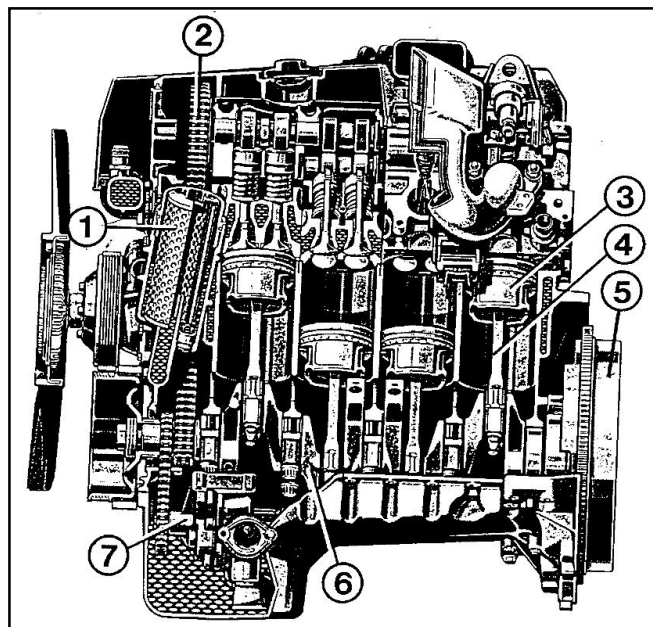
Longitudinal sectional view of the engine with the location of some of the parts.
